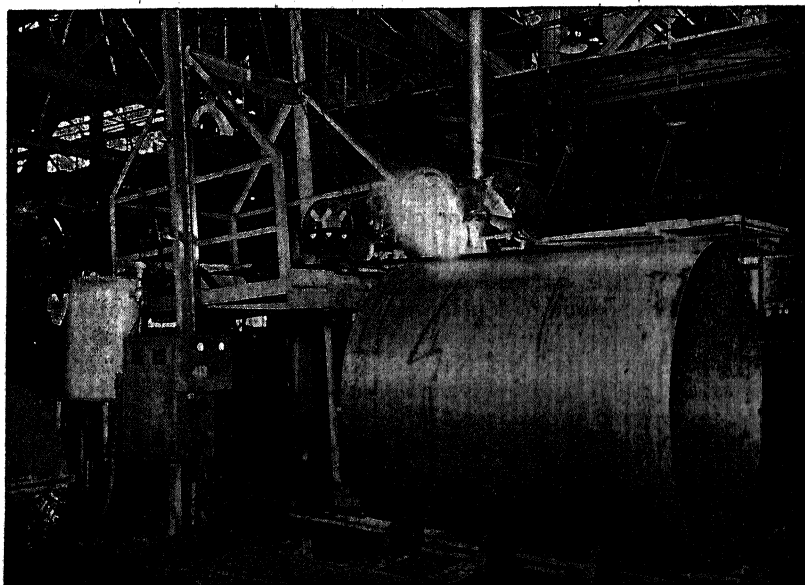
Shop fabrication of storage tanks with a tractor type automatic shielded carbon arc welder.
